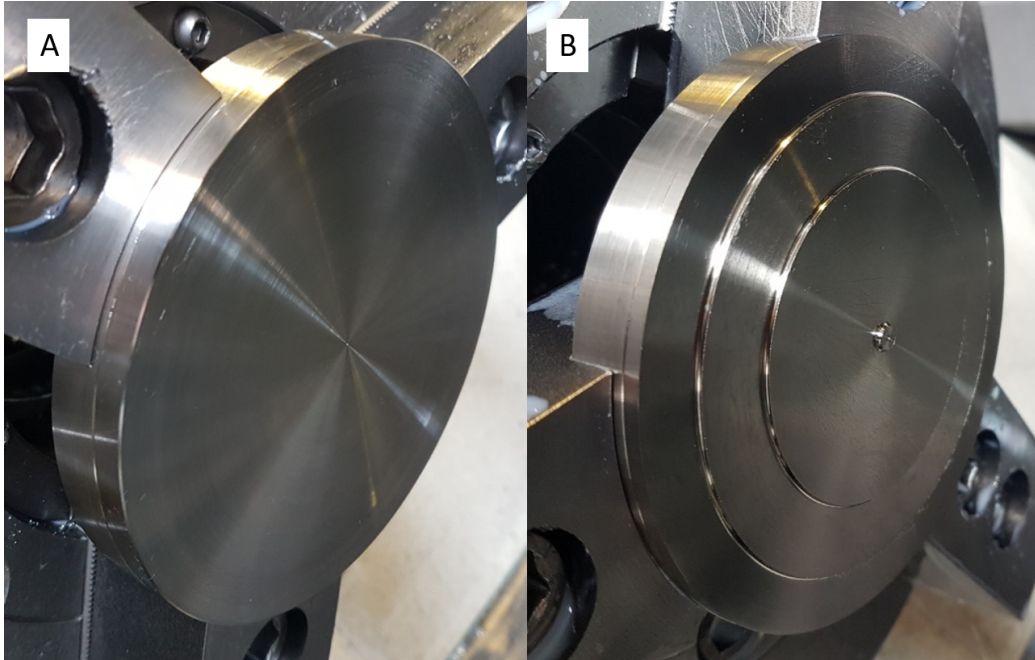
Photograph showing an example of an as-FAST billet (A) prior to machining and (B) Post machining.
